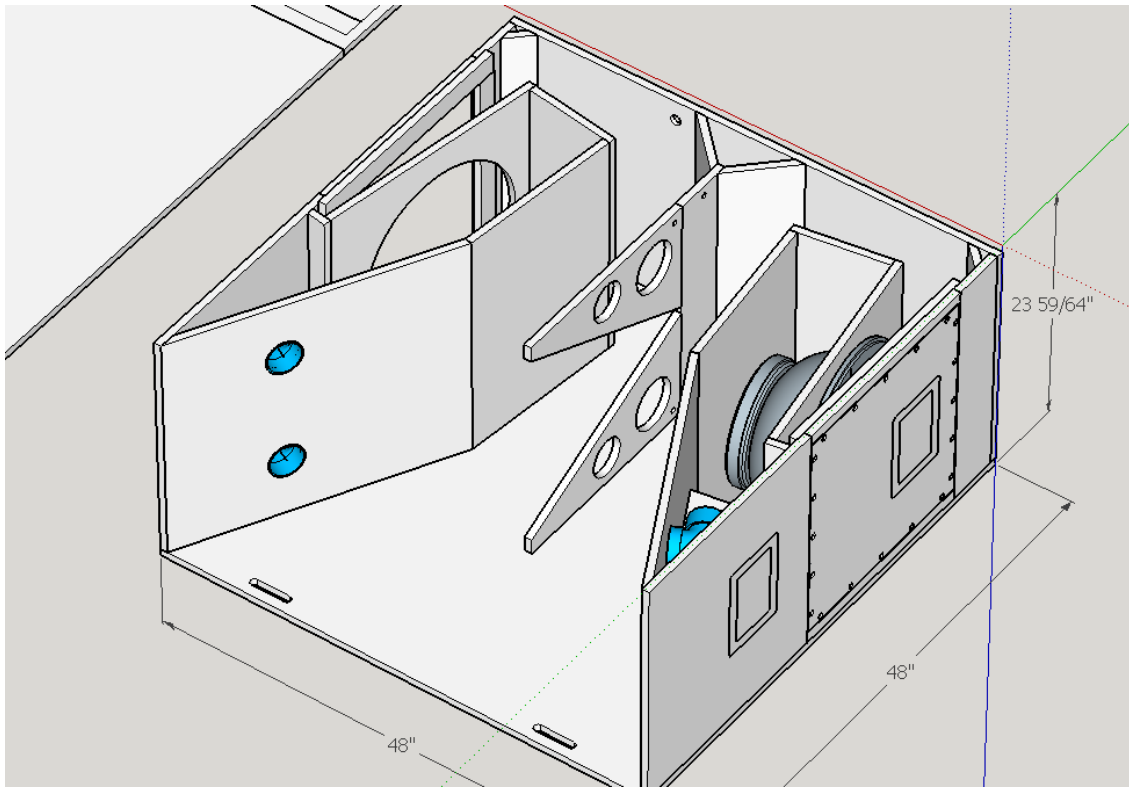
Step 3, More Parts. Pocket Screws? Yeah...next picture.
